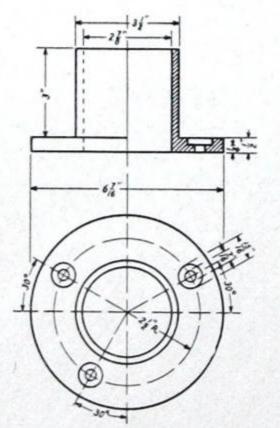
Adapter Plate with 3½ inch (diam.) Shank to fit Sol-lux Casings.
